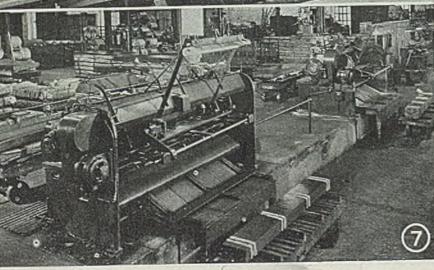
Edging mill combines rollar leveler and edge roller into single machine as shown here
